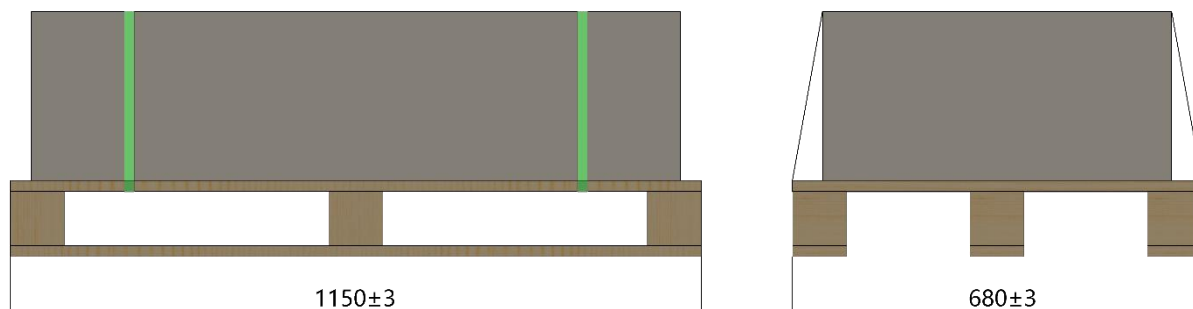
Spare Parts Packaging Dimension Drawing (Unit: mm)
